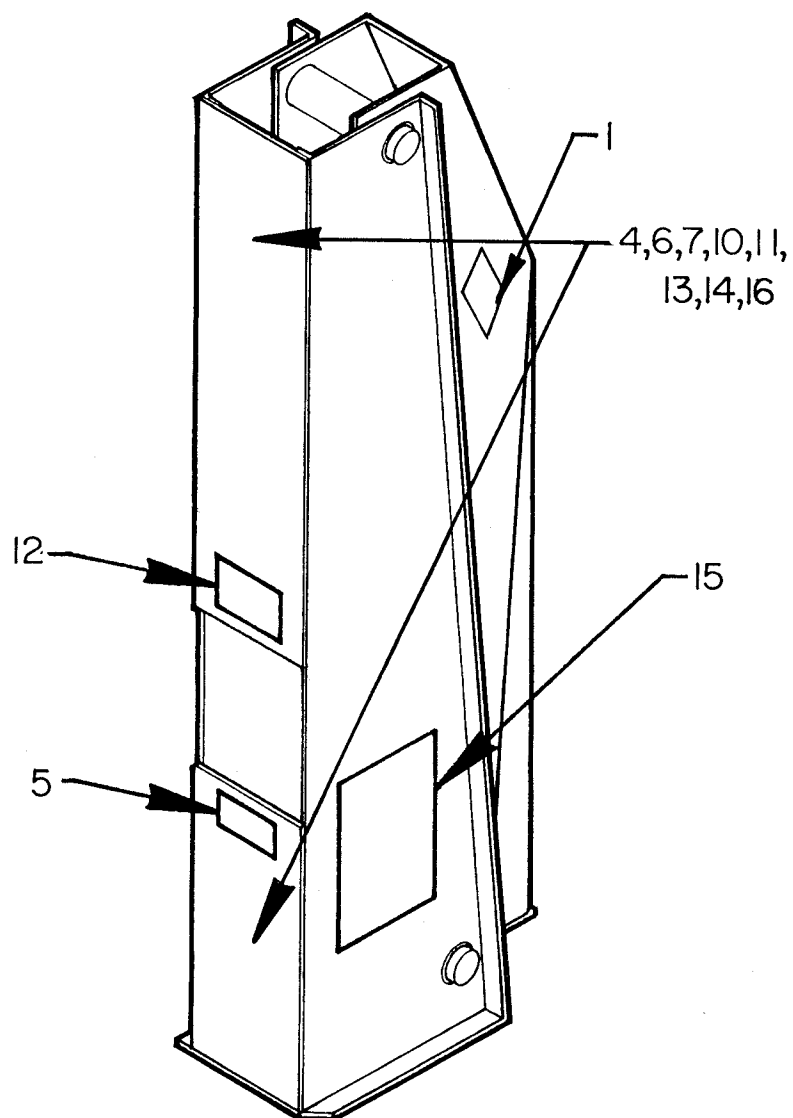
Installation Kit - Steel Body (Part Number 93705527)
